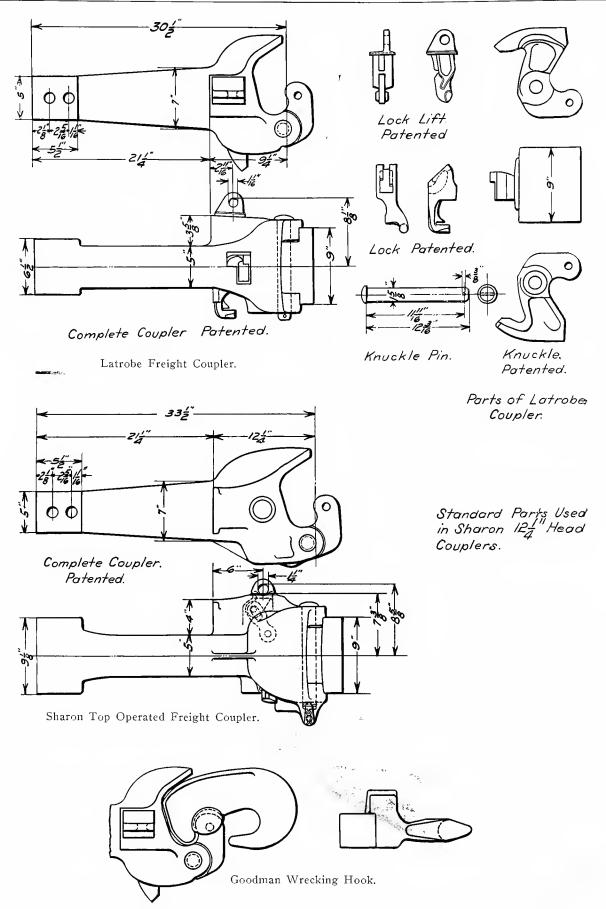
Latrobe and Sharon 12¼-in. Head Freight Couplers and Goodman Wrecking Hook. National Malleable Castings Company.
